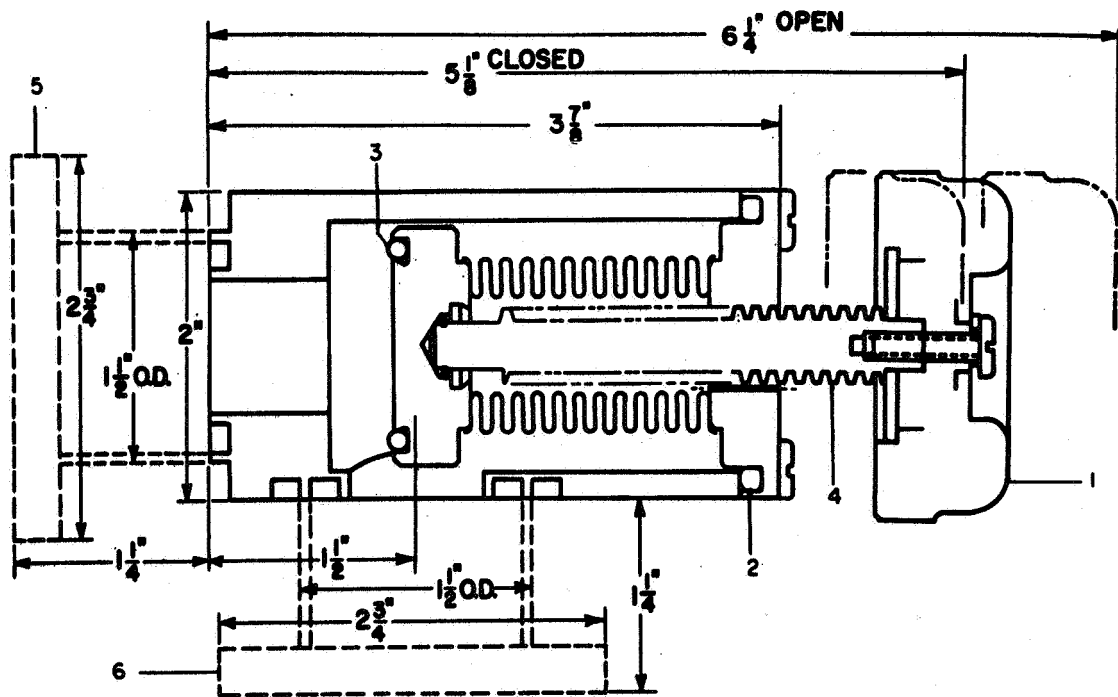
High-vacuum block valve dimensions – Model 22HV125
